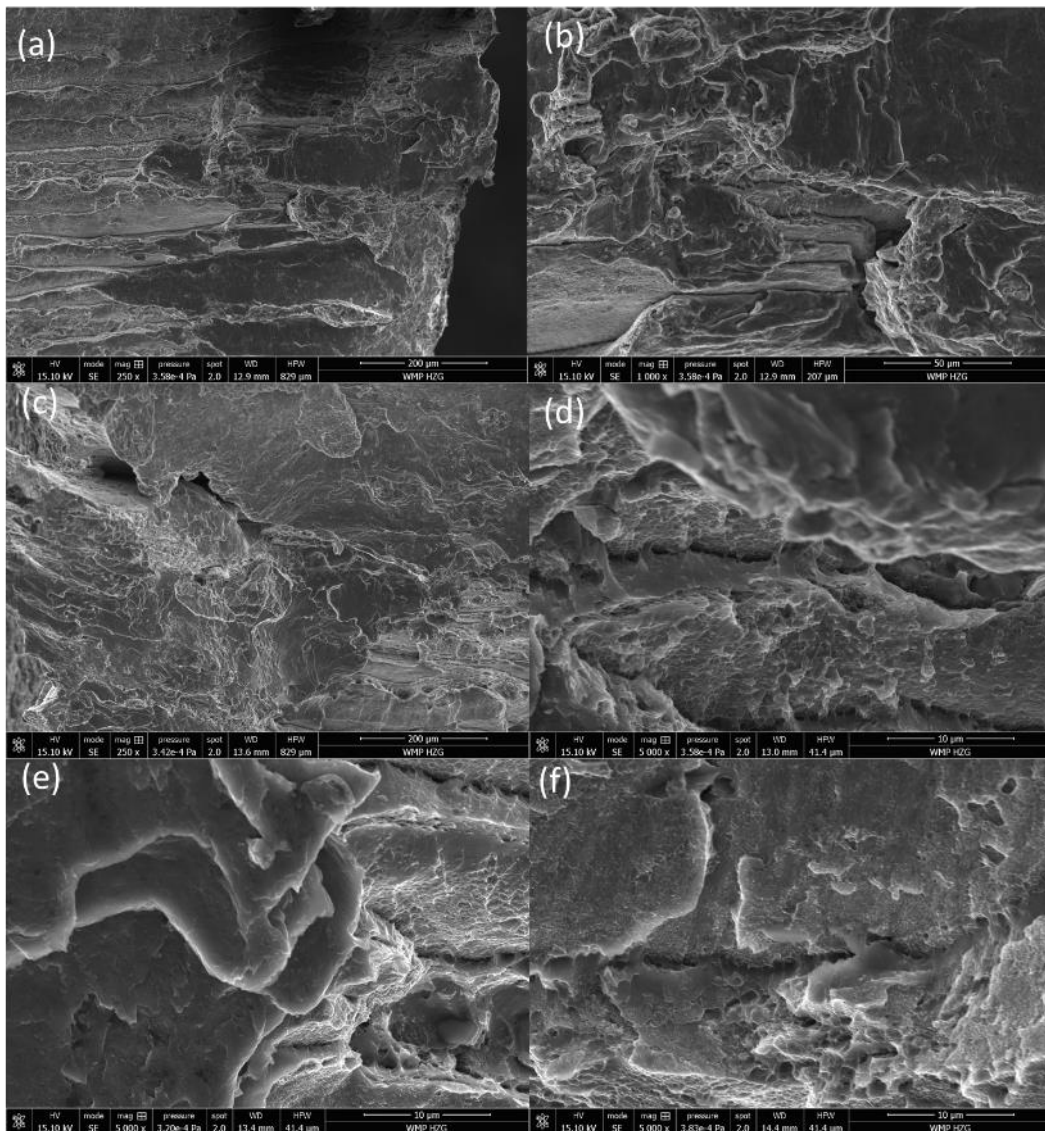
Microscopic fracture surfaces of AA2196 SSuBT-FSW LEW tensile sample: (a) to (f) SEM magnified views perpendicular to fracture.
